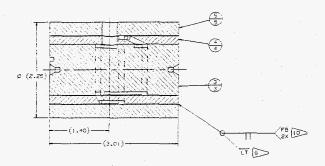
Drift Tube Slug Showing Cross Sections of Cooling Passages.
